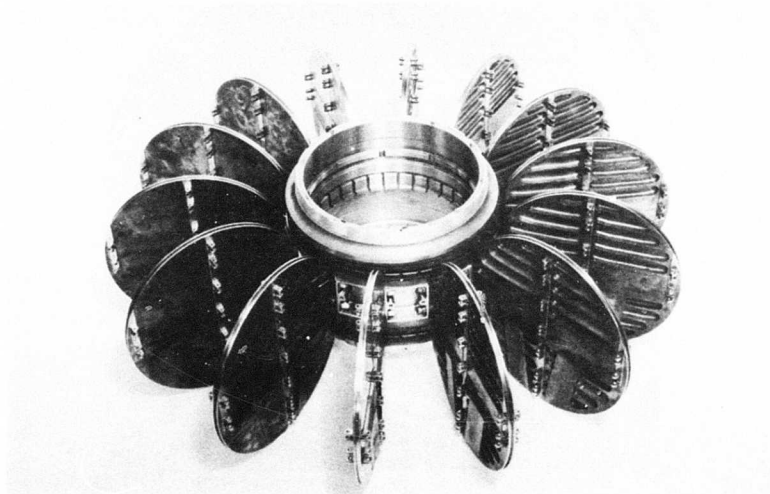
Hub With Ring Seals and Bulkheads Bolted in Place.
